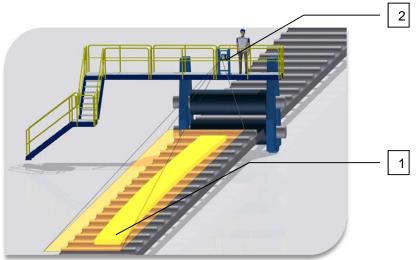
EMG hotCAM in a reversing mill: viewing area of the camera system [1], camera unit [2].
